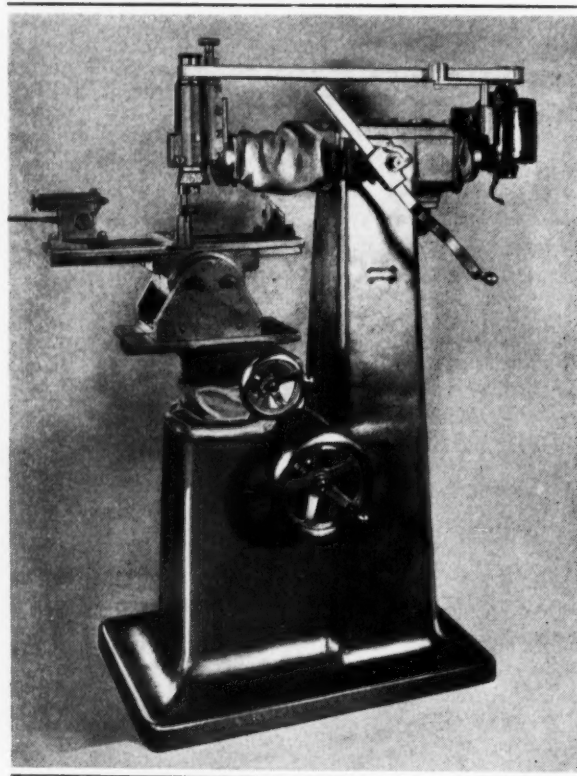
Oliver Tool- and Cutter-grinder with Reciprocating Ram for the Grinding Wheel
